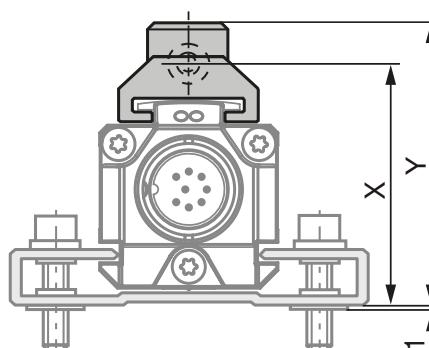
Dimensions and distances with BTL5-M/N-2814-1S magnet
